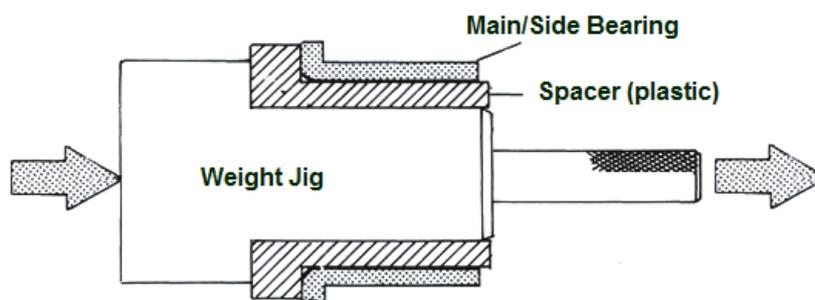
Spacer and Weight Jig (example) for press fitting a Bearing
